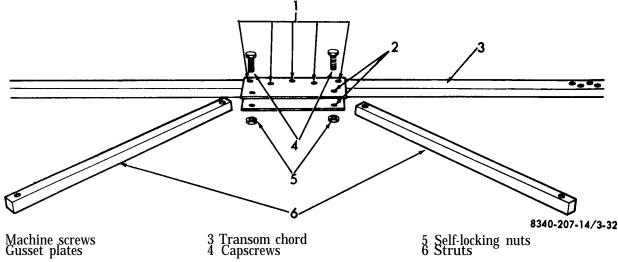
Transom chord and struts, disassembly and reassembly.
